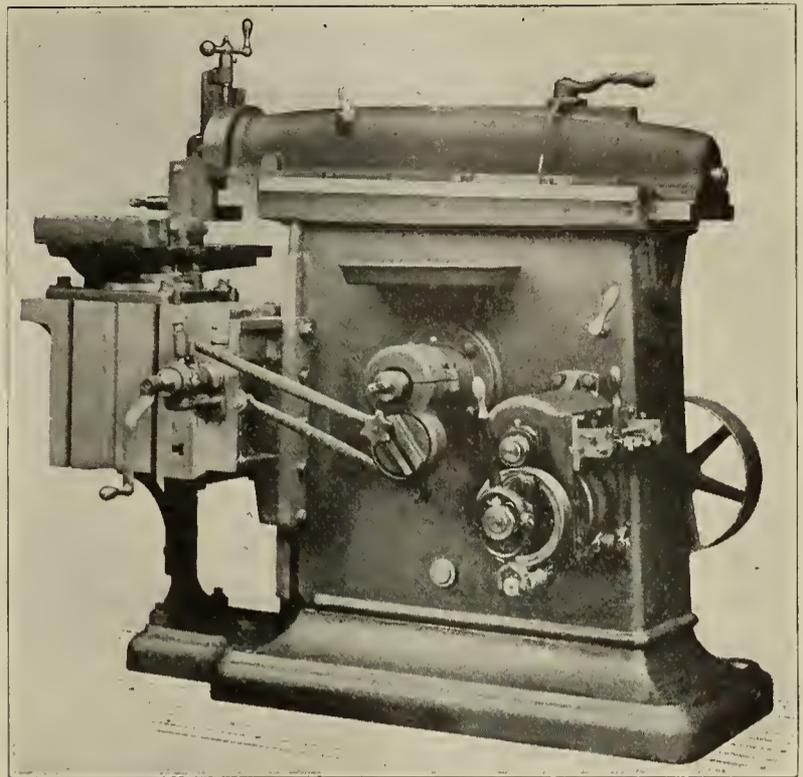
, 2, 3—IMPROVED GEAR BOX.
